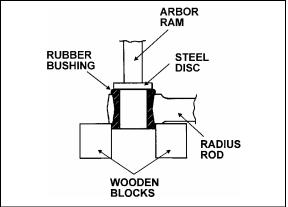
RADIUS ROD BUSHING REMOVAL
